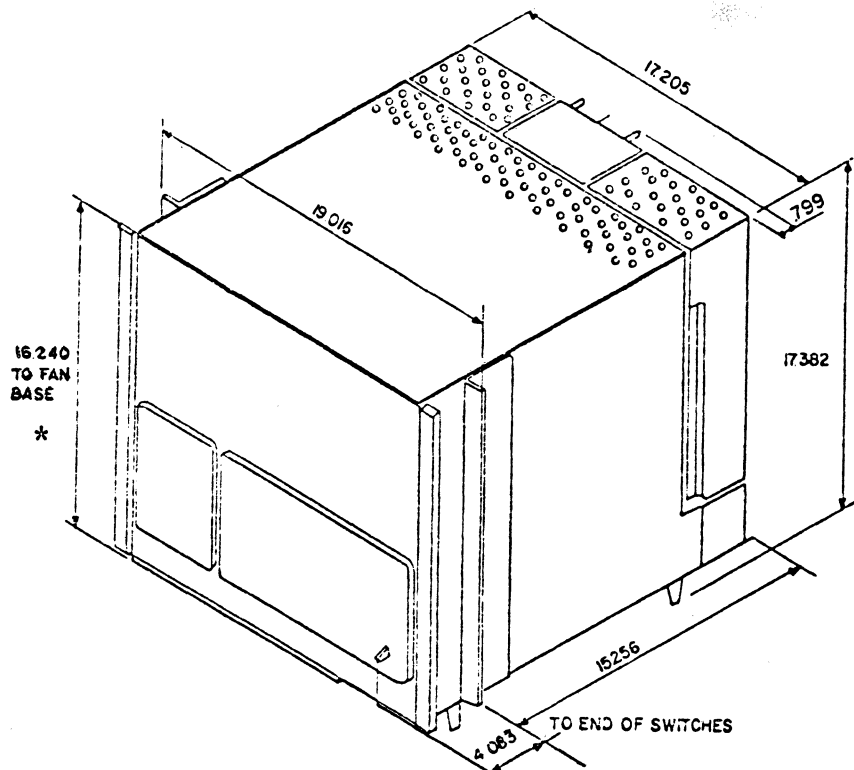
External Dimensions of Main Enclosure: Type Identifiers A,C,D
